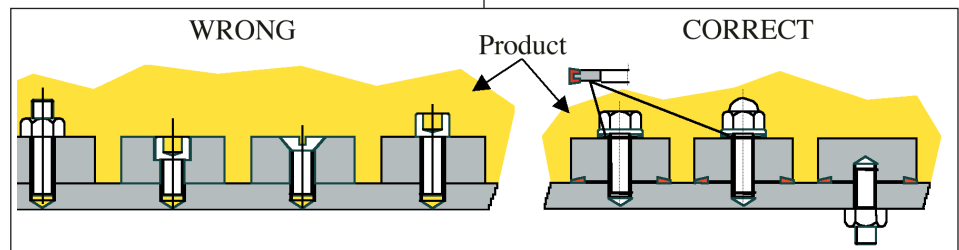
Examples of unhygienic fasteners (left) where soil is trapped in crevices at the metal-to-metal contact surfaces and screw threads.
